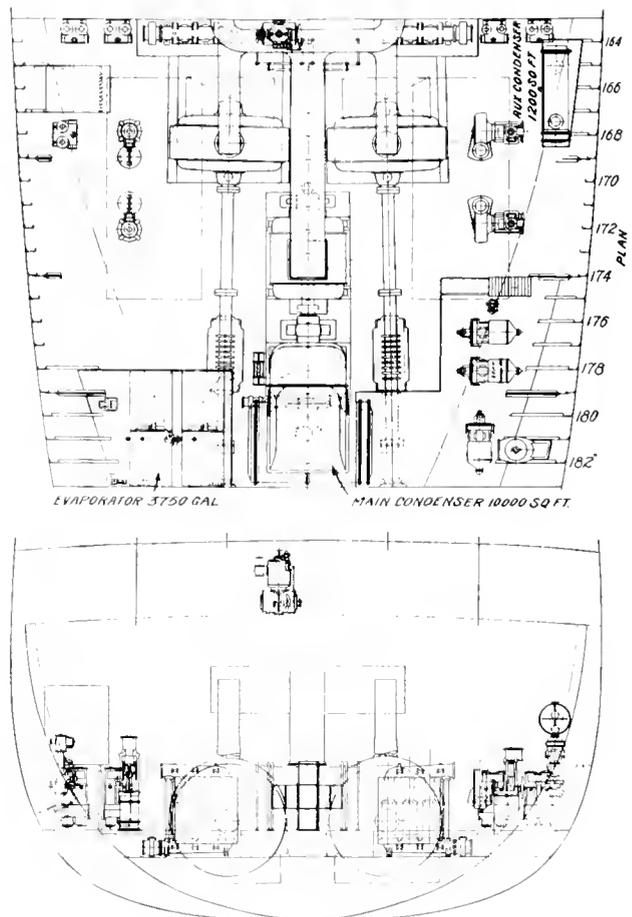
Arrangement of Electrical Propelling Machinery shown in Plan and Elevation
